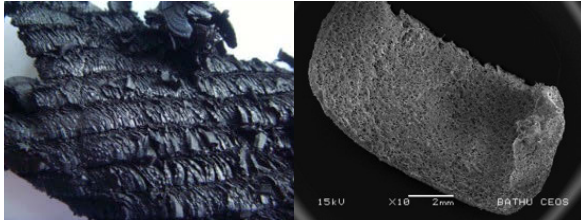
Surface from dry machined rubber and a fully formed chip from cryogenically machined neoprene
